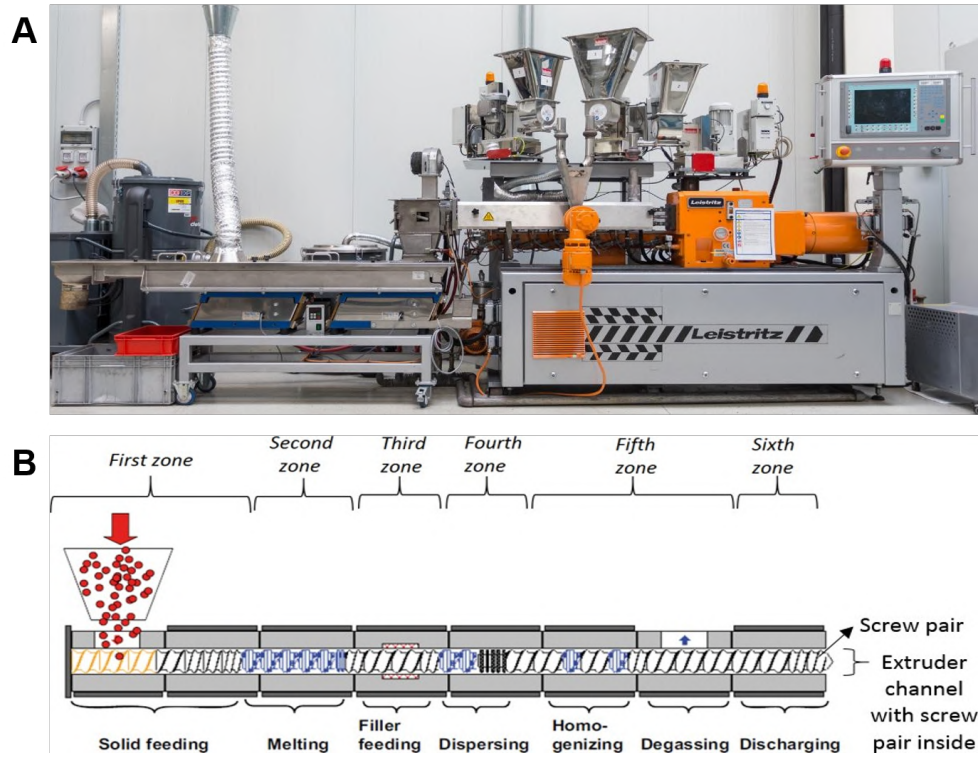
The extrusion of mixture of Nd-Fe-B, PPS and additives in a industrial scale machine to fabricate the material for inject molding. A) Shows the picture of Leistriz ZSE 27 extruder. B) The schematics of the steps taking place inside the machine in order to provide homogeneous mixture of the output material.
